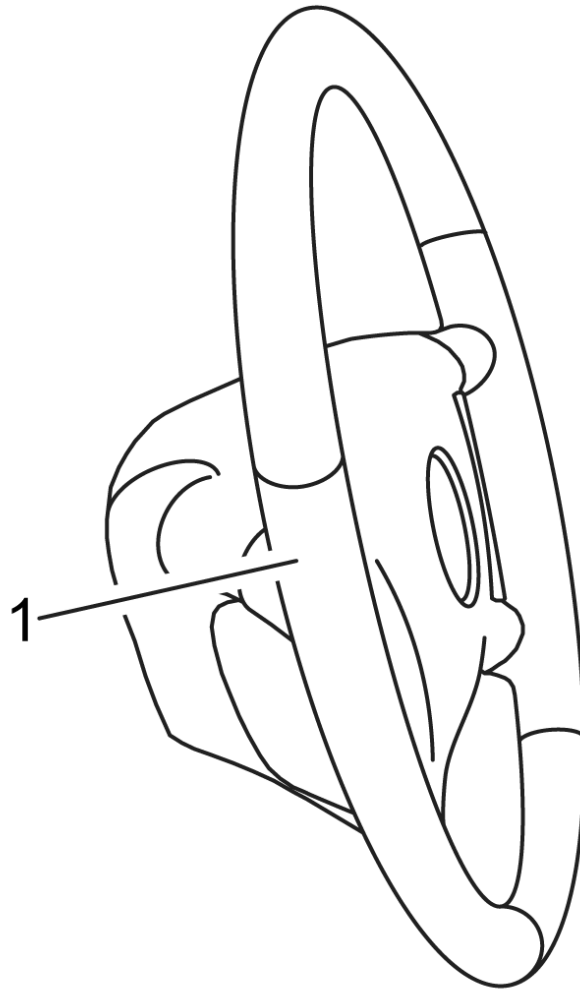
Steering Wheel Rim Infrared Measurement Point
